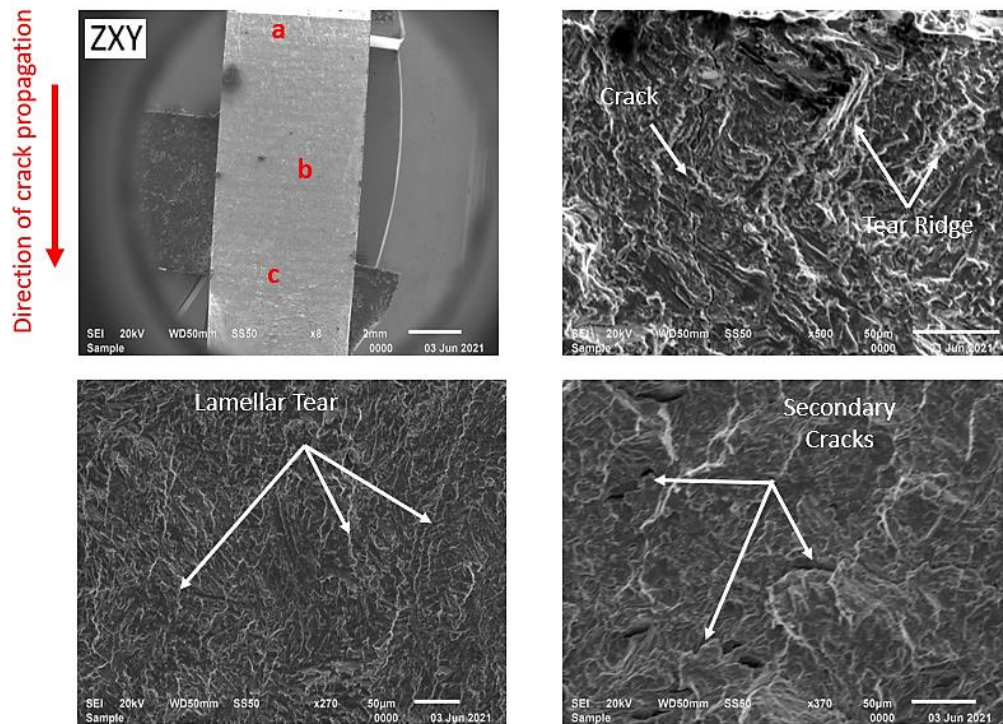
14. Representative SEM images of the fracture surfaces of ZXY FCGR specimens indicating the (a) crack initiation section, (b) crack propagation area, and (c) final fracture region
